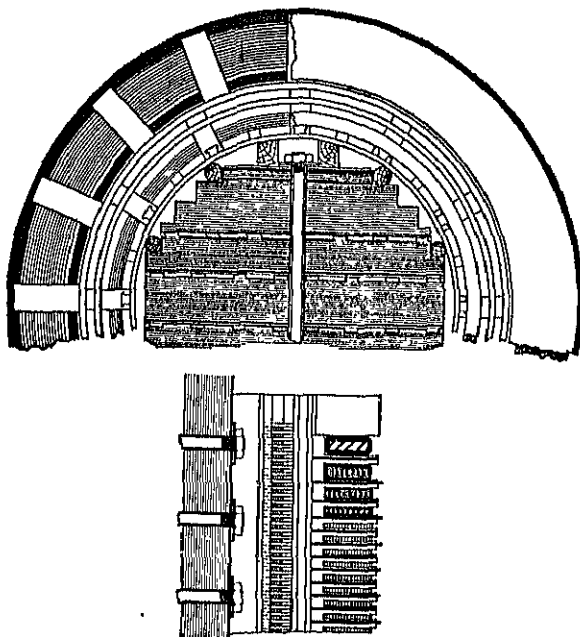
Concentric type winding and insulation—132,000 volt transformer.
